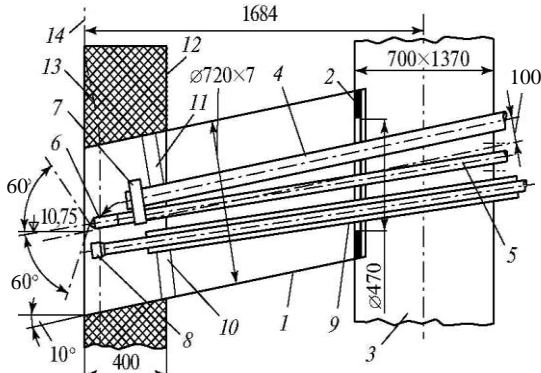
Pulverized coal and oil direct-flow burner of TP-87 boiler: 1 - body, 2 - bounding puck, 3 - air box; 4 - HDC pipe $\varnothing 89 \times 6$ mm, 5 - compressed air pipe $\varnothing 42 \times 5$ mm; 6 - jet spray nozzle, 7 - clamp, 8 - head of steam and mechanical nozzle, 9 - spray pipe, 10 - plate mounting the nozzle tubes, 11 - plate mounting the HDC pipe, 12 - embrasure box (welded by overlays to screen tubes) 13 - screen tubes, separated into the embrasure; 14 - axis of screen tubes
